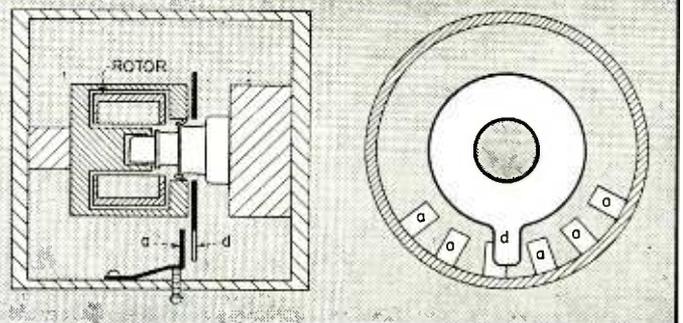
Cross-section and end views of oscillator, showing C_F of Fig. 6 added to eliminate sliding contacts
